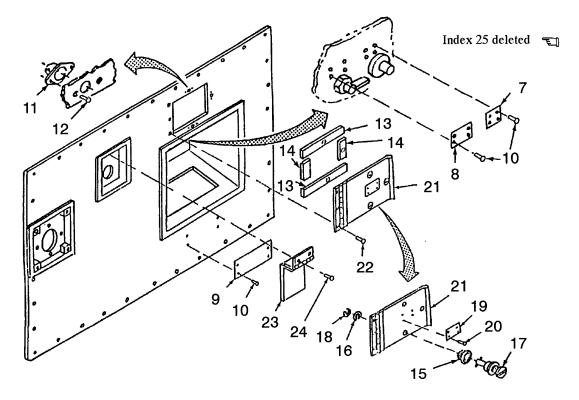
Rear Panel Assembly (Sheet 2 of 3)
